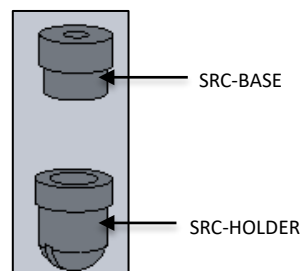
SLIP RING COUPLER (1) CONTENTS
